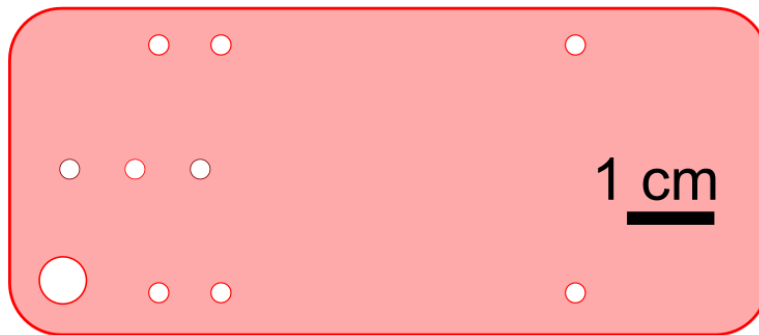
Vector drawing for an acrylic sample holder drawn in Inkscape. All of the solid lines represent cuts performed by the laser cutter. The smallest holes are holes meant for 4-40 tapping
